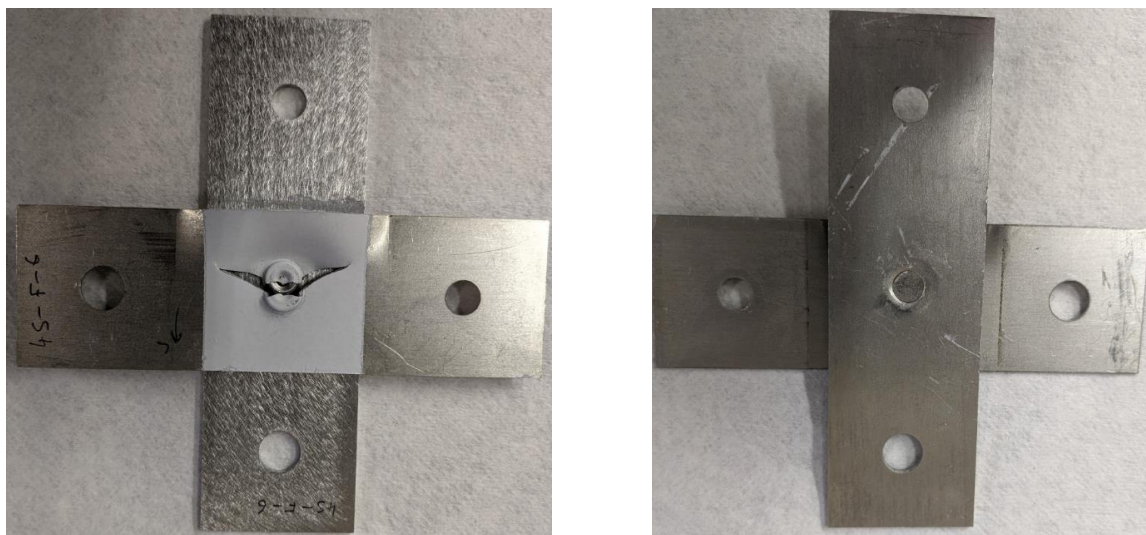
Al 6016 2mm by 1mm SPR cross-tension post fatigue test 45° test pierced 2mm sheet (left) and clenched 1mm sheet (right) $N_{final} = 663,483$
